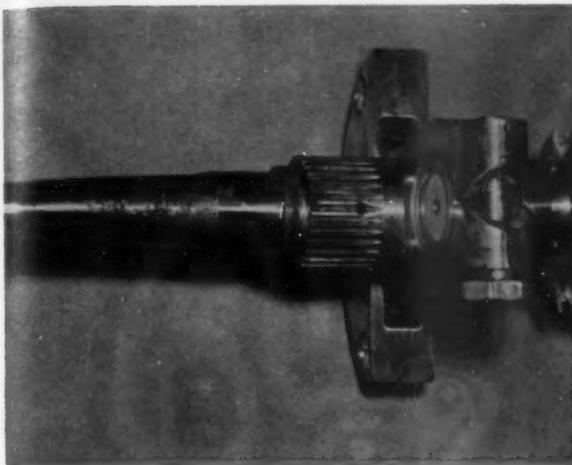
Corrosion of an unplated propeller shaft. Consideration is being given to the use of Cadmium-Tin plating for these parts.
